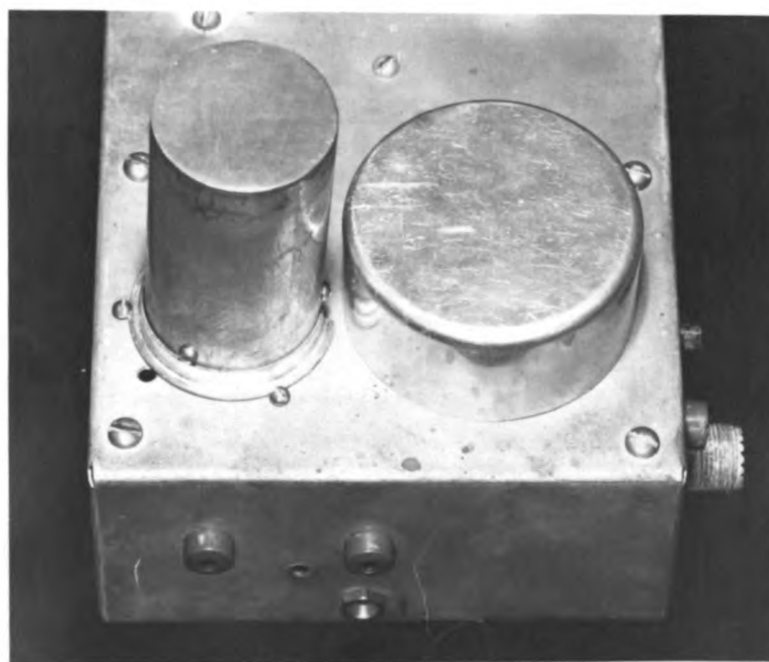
CLOSEUP OF COIL AND TUBE SHIELD IN POSITION.
